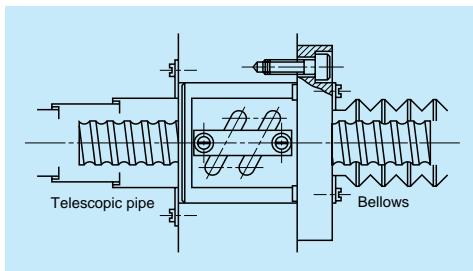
Dust prevention by telescopic pipe and bellows
